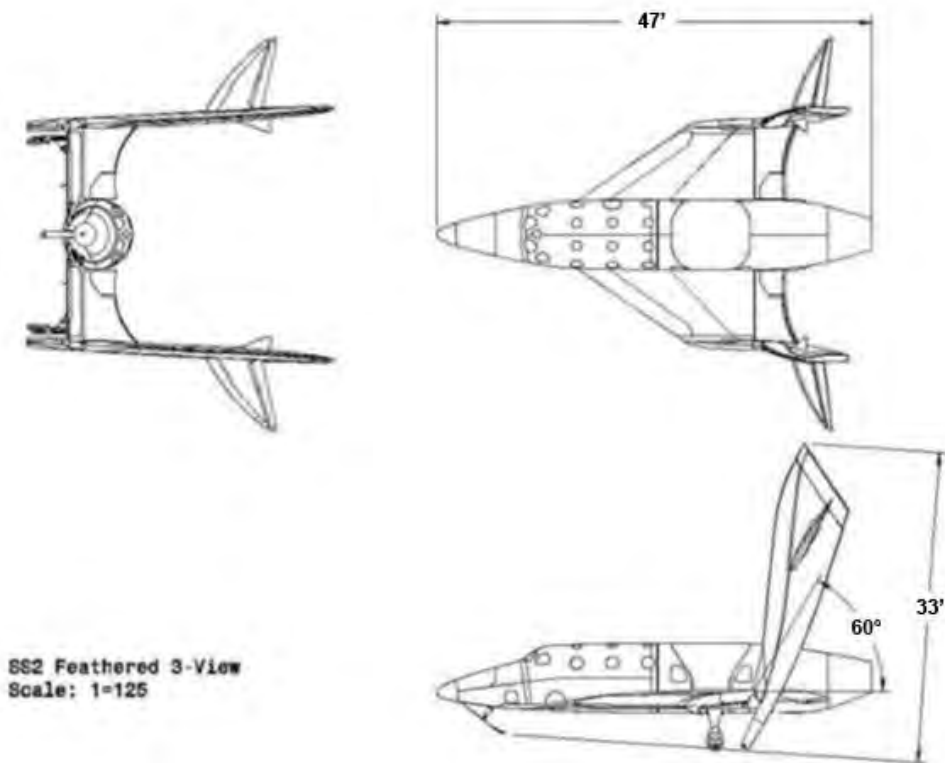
SpaceShipTwo 3-view drawing in feathered configuration
